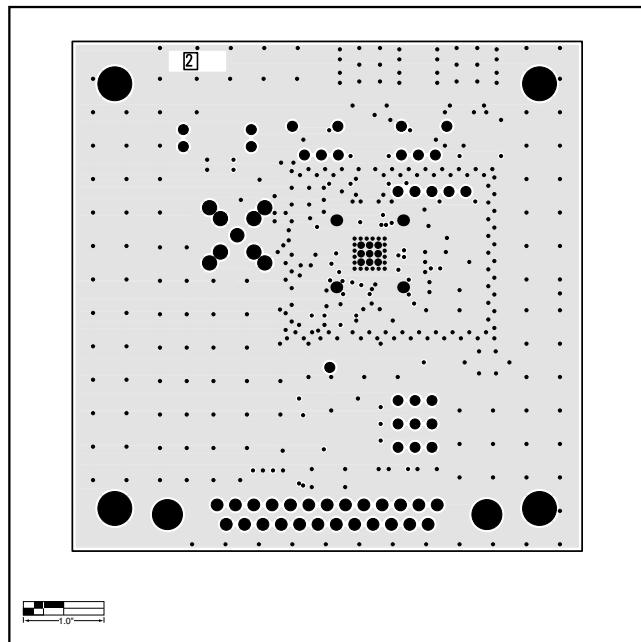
MAX355/MAX357 EV Kit PC Board Layout—Inner Layer 2
